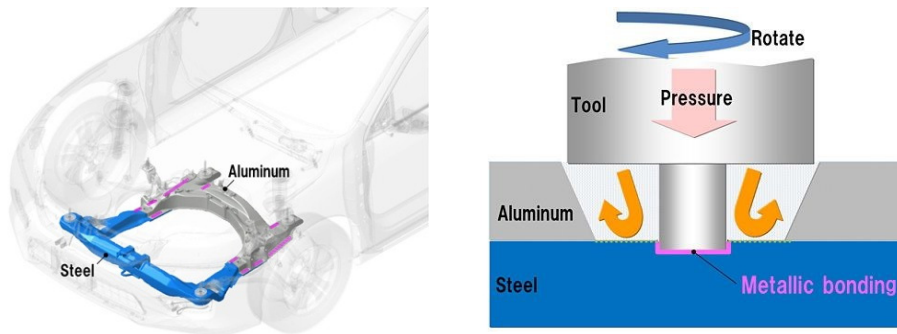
Aluminium and steel joined by FSW in the Honda Accord (welded parts marked in pink) [29, 30].
